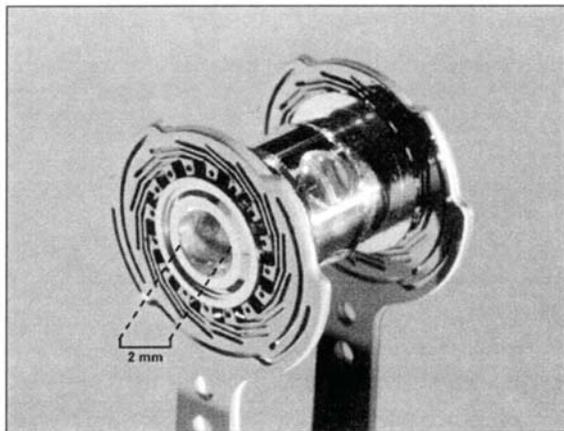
First prototype assembly of a hohlraum inside of the thermal mechanical package.
